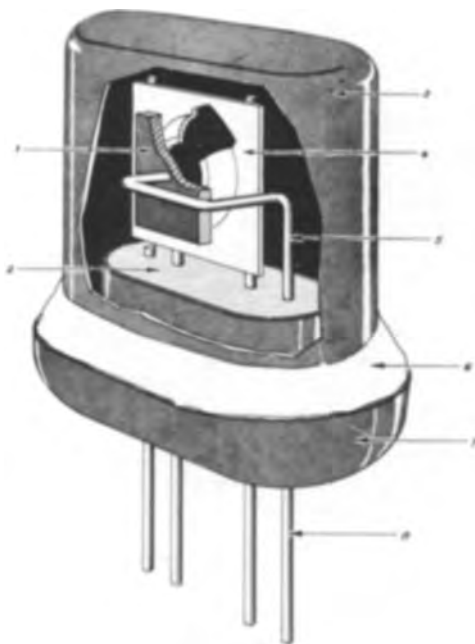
Sealed diode test specimen used for evaluation of base plate materials: 1, Si wafer with diffused junction; 2, glass; 3, gold-plated can; 4, embossed alloy-clad base plate; 5, Au-Sb electroplate on this pin; 6, Sn-Ag eutectic solder; 7, Kovar eyelet; 8, Mo pins.
